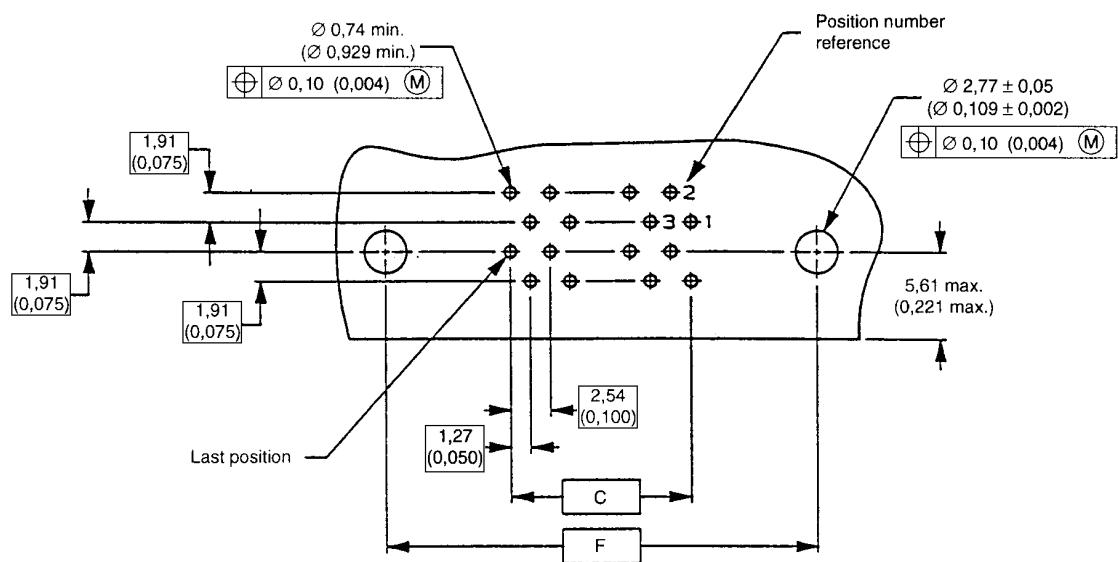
Detail for 16, 20, 28, 36, 40, 60, 68, 80, 100 and 120 positions, connector side of board
